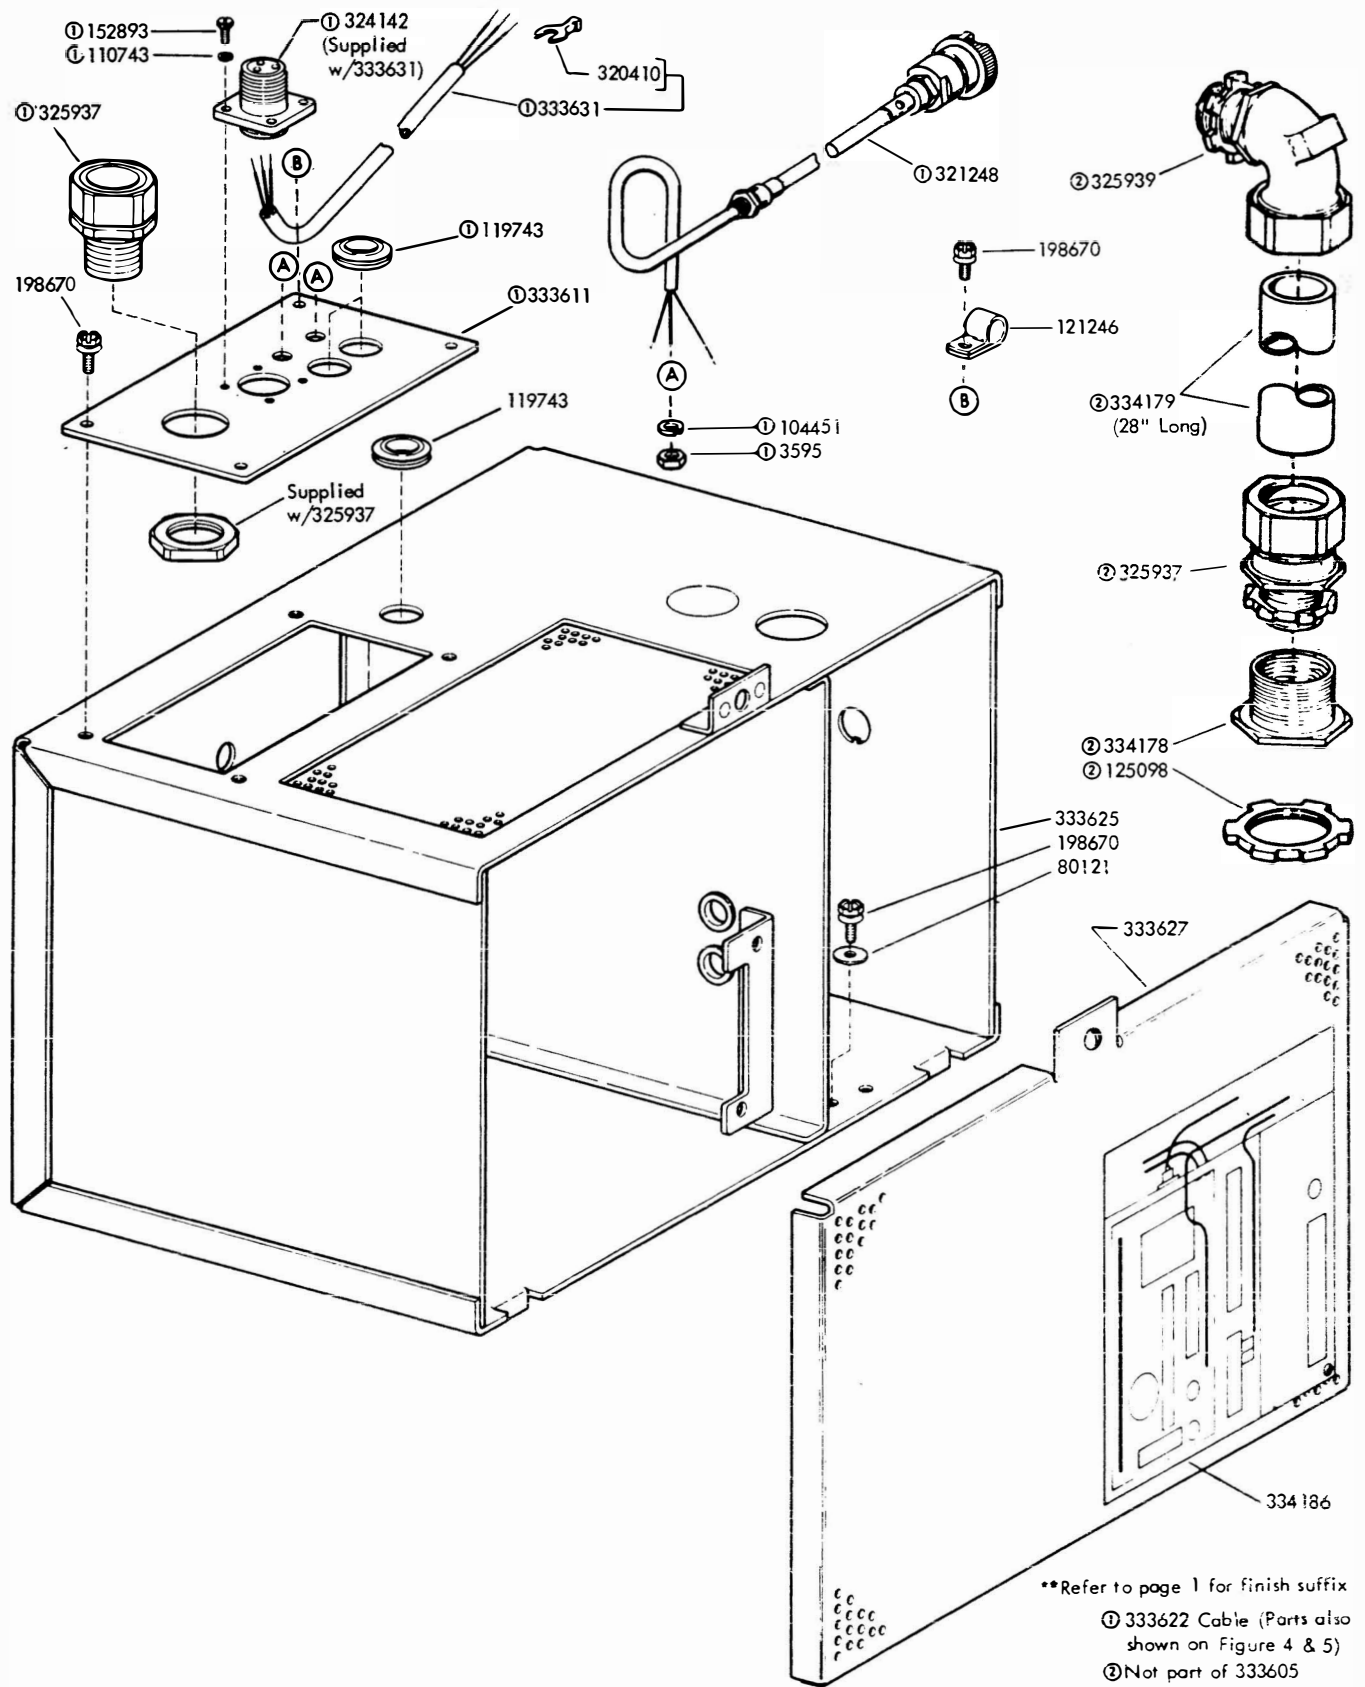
333605 POWER SUPPLY ASSEMBLY (PART OF 336011 SEE FIGURE 4)
